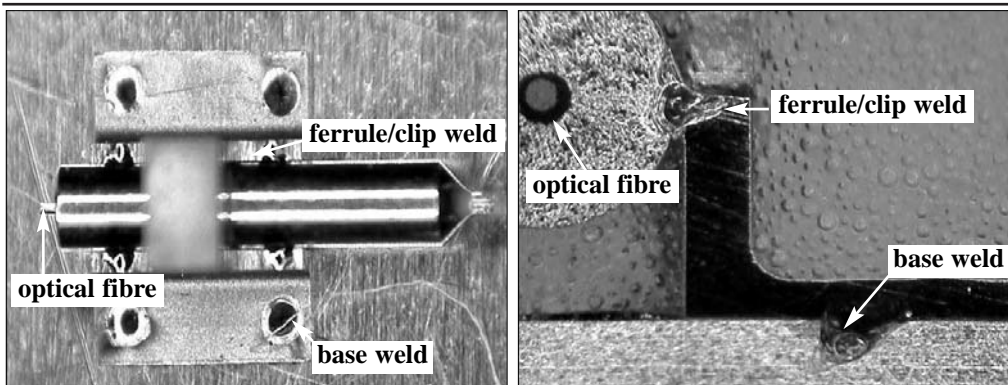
The left picture shows a plan view of the ferrule and clip assembly, with base welds and clips welds. The right picture is a cross section of one side of the ferrule and clip. Notice the fibre centered in the ferrule, this is 125 μm in diameter. The base lap weld and the ferrule to clip fillet weld are shown. To avoid the tooling the beams are angled typically 25 degrees from normal; this angle is apparent in the base weld.
